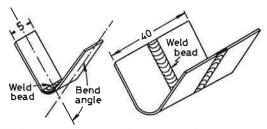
Specimen dimension for welding and its groove shape for insert of Re or Nb wires as filler metal.
